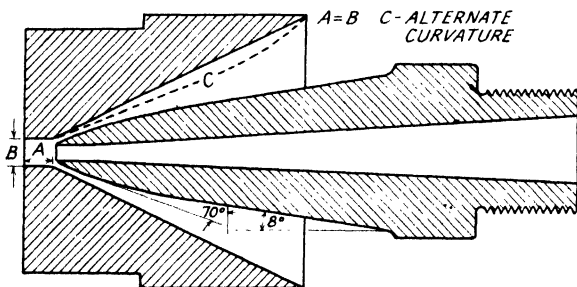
Typical set-up of dies for extruding vinyl plastics. In making tubes the centre hole would be blocked<sup>4</sup>
